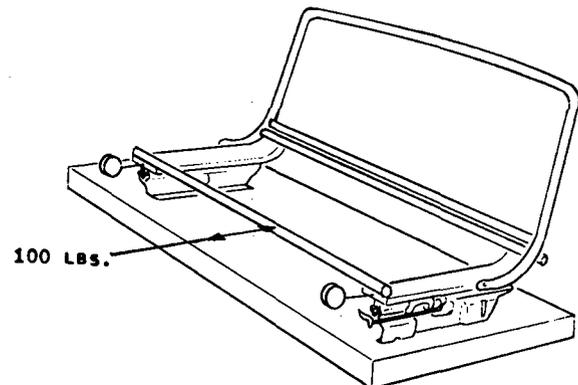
Static fore and aft chucking test of seat adjuster
